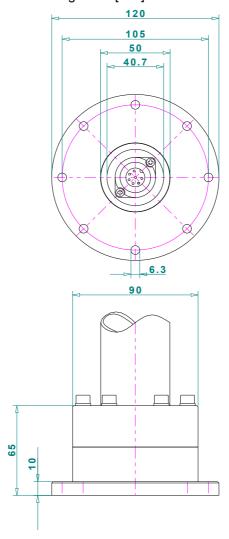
Antenna Unit, mast flange (mechanical dimensions)
